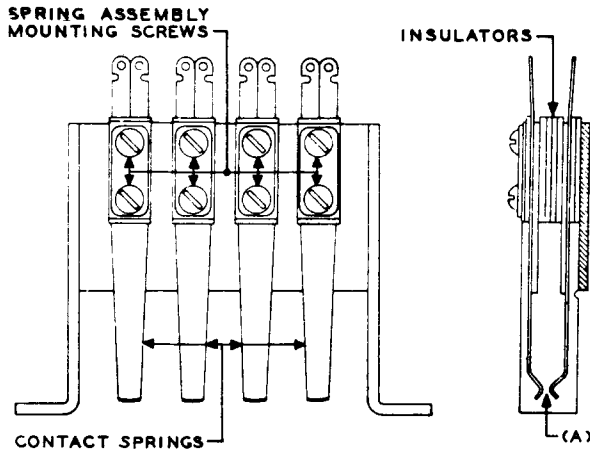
No. 26B Connecting Block With Four Spring Assemblies
